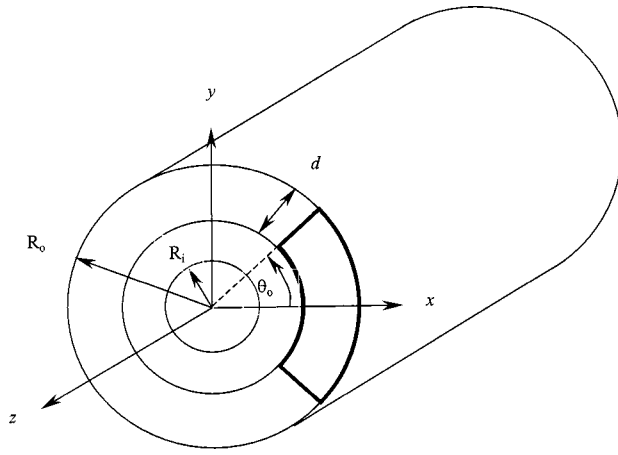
Geometry of a steel pipe. R_i , inner radius; R_o , outer radius; d , crack depth; θ_o , half circumferential crack angle.
